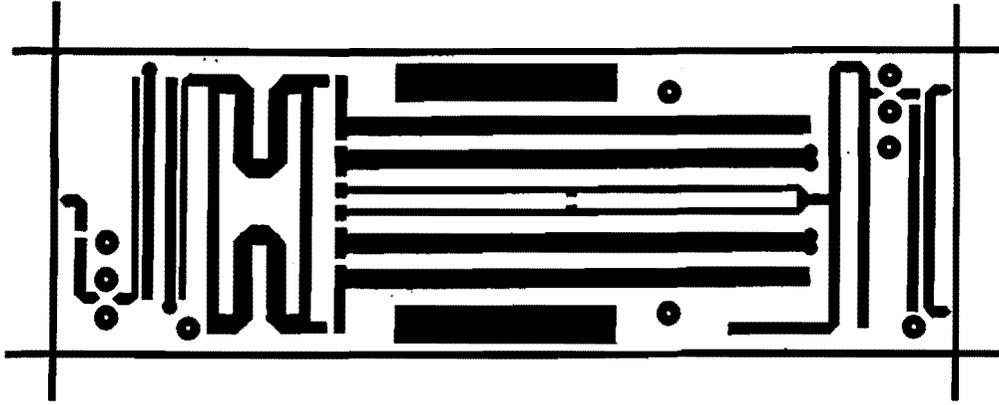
1296 MHz TX mixer PCB (0.8mm double-sided FR4).
